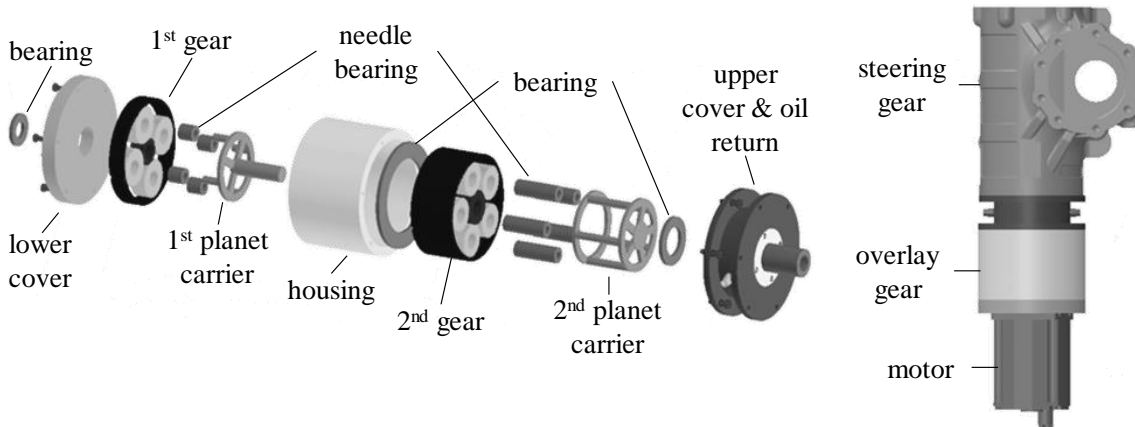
Exploded view of overlay gear (left), installation position of EPS (right)
